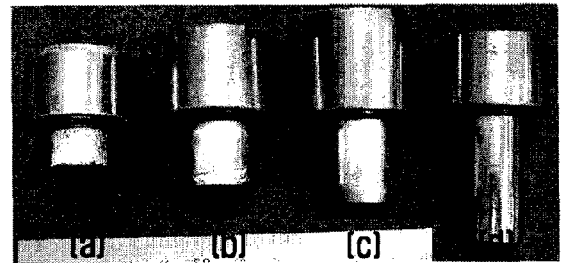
Deformed shape of the combined extrusion work piece under the constant forward extrusion diameter 15mm, Backward extrusion diameter : (a)15mm, (b)22mm, (c)26mm, (d)28mm
